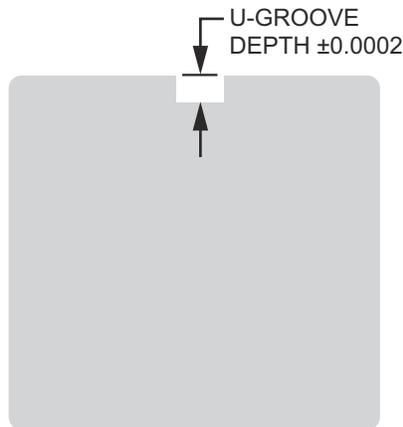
Round Thread Height Gauge Setting Standard (3/4 in. TPF Buttress Thread Height Standard)
